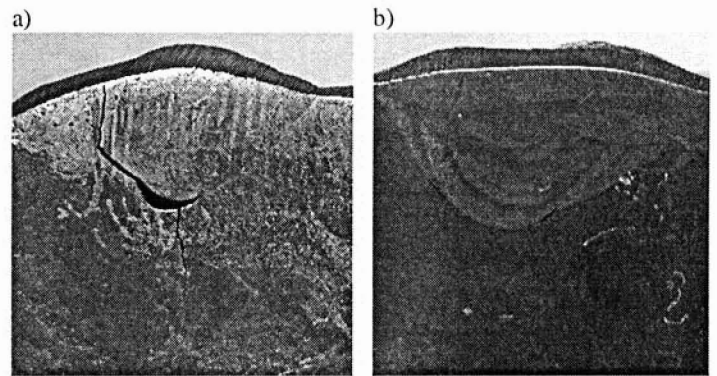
Macrostructure of padding weld after surfacing by welding TIG of chromium cast iron EN-GJN-XCr15: a - on cold (without preheating), b – on hot-cold (preheating temperature 300°C)
